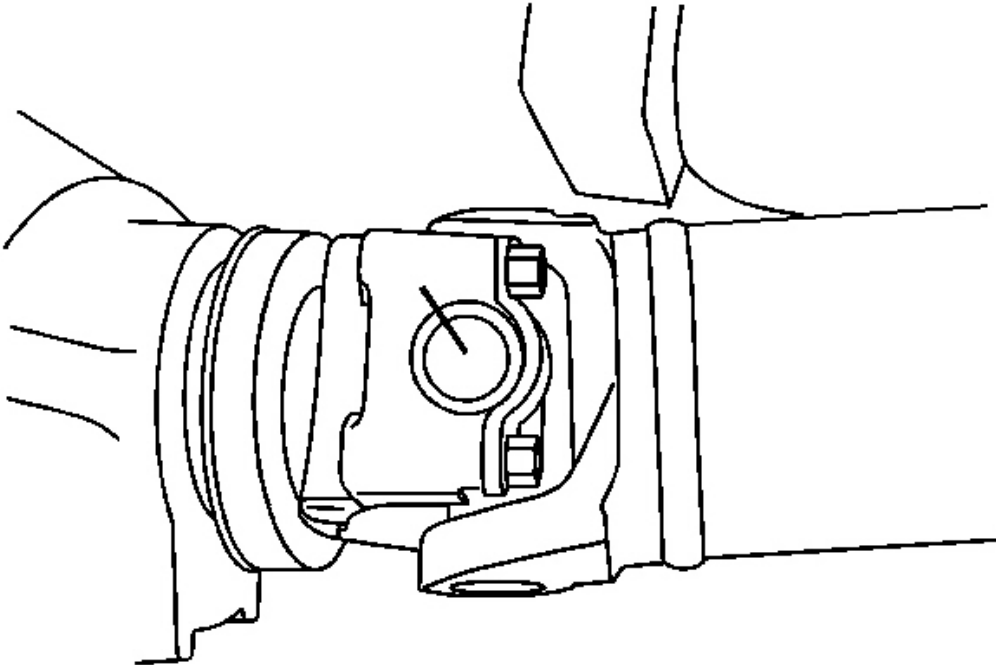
View Of Marked Rear Universal Joint To Drive Shaft Flange
